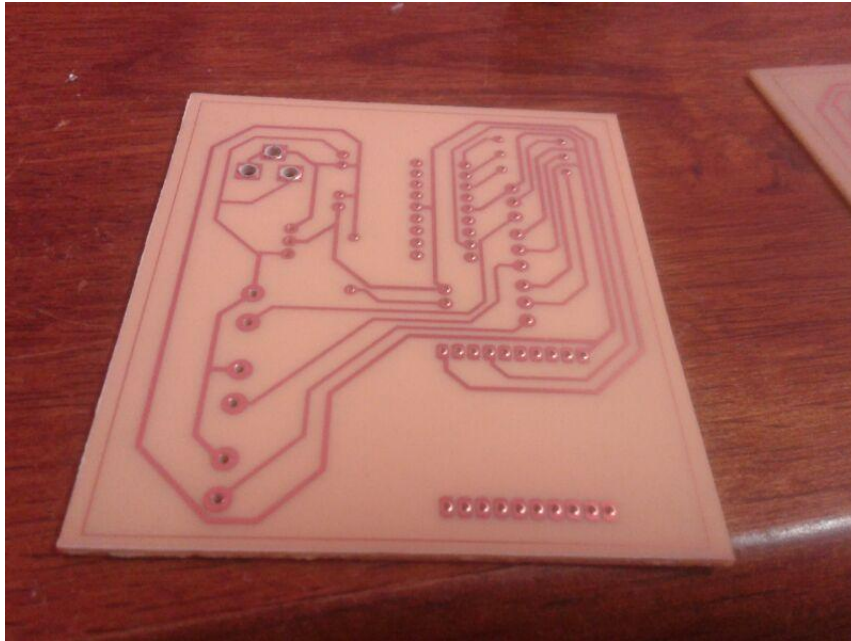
The Design Of The Printed Circuit For Receiver On The PCB Board
